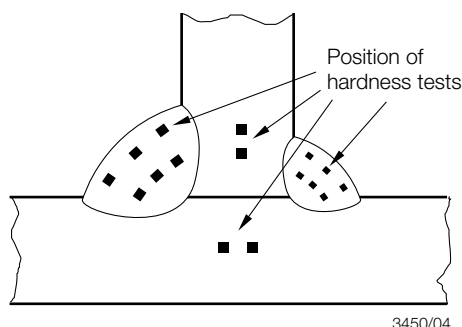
Hardness tests for fillet weld test assembly
